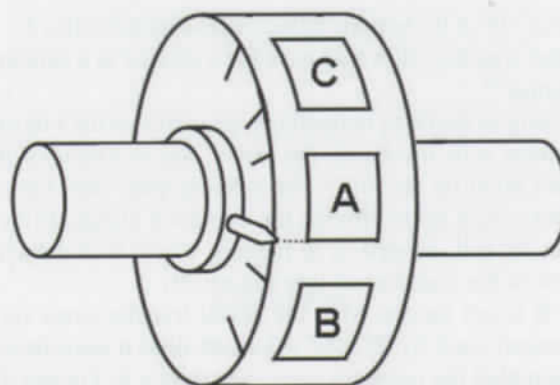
Drawing of transfer roll with side point positioned to bottom of middle ("A") relief. Used for the entry of row 10, with the "A" relief used as the guide relief.
